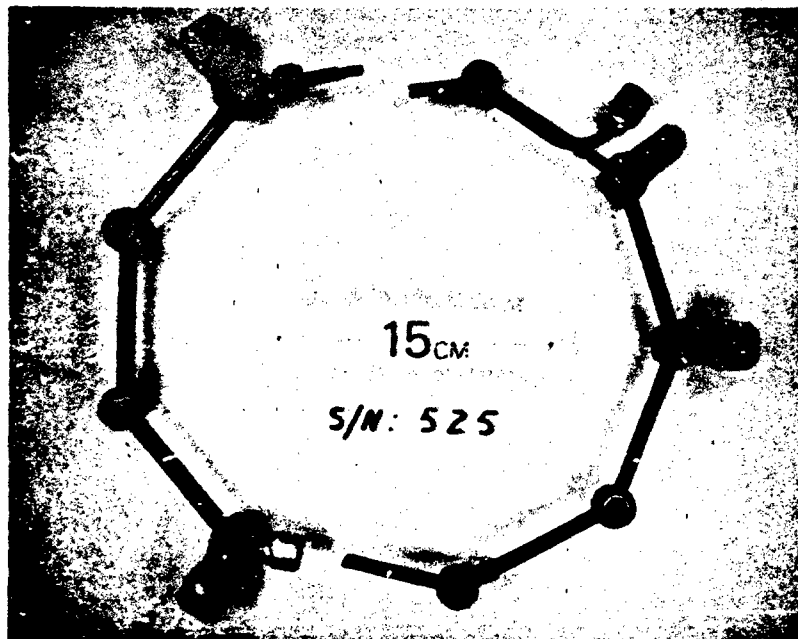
Cracked stainless steel Solar Saturn fuel manifold.
